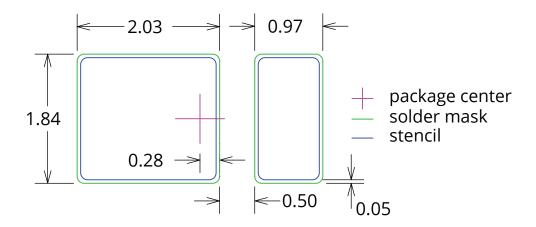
Recommended PCB solder pad layout for LUXEON 2835 Line.
